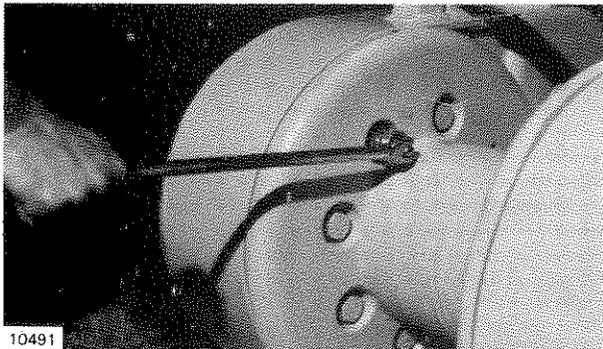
ASSEMBLY OF THE CLUTCHES (Page 2 of 3)
